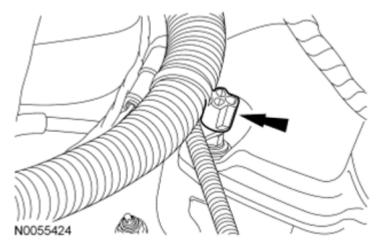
Locating Oil Level Indicator Courtesy of FORD MOTOR CO.
